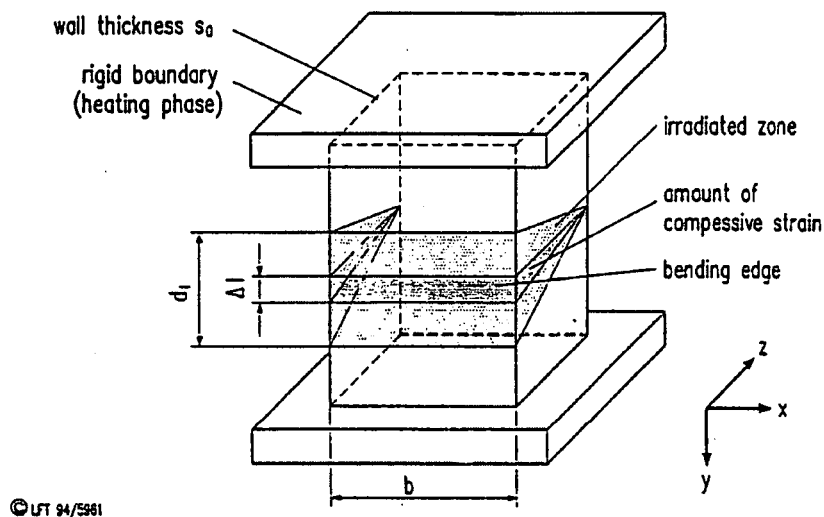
Model for extrusion bending using upsetting mechanism [15]
